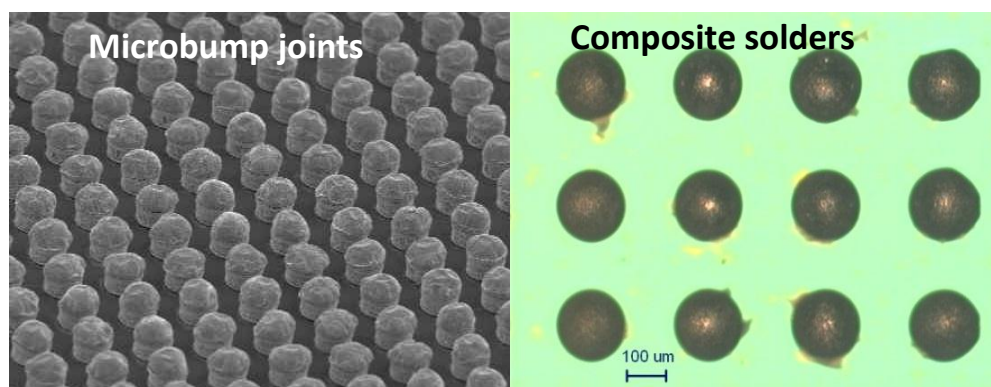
Shows the solder bump after reflow and PR strip (a) microbump over the Cu pillar (b) SnAgCu/Cu solder joints.
